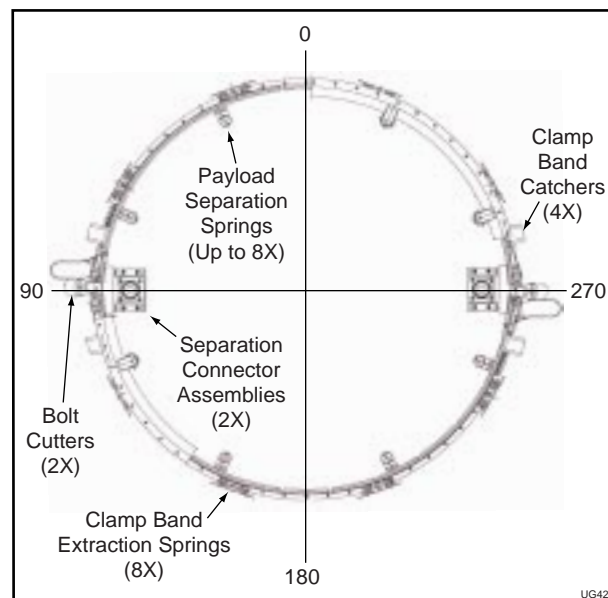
Typical Layout of Taurus Separation System (38.81" System Shown with Forward Ring Partially Removed to Show Lower Ring).
